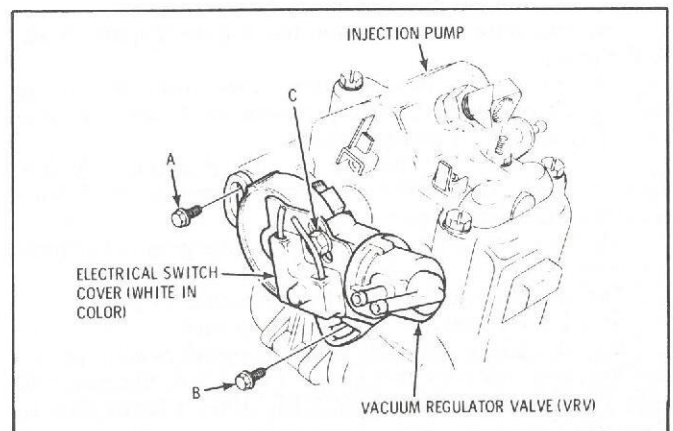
C5-1—Vacuum Regulator Valve Electrical Switch Identification
